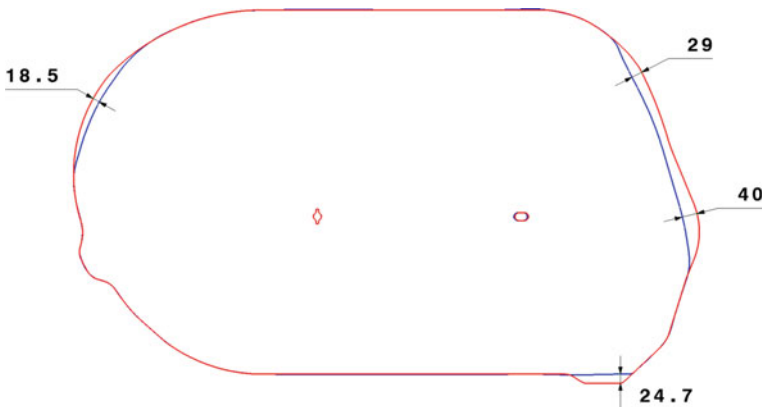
Blank shape comparison. Red is the initial blank shape and blue is the final optimised blank which yielded successful panels
